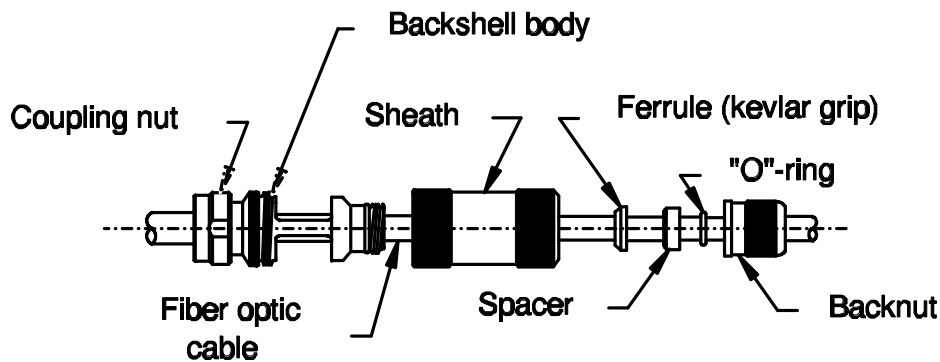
A1-1. Backshell parts on the cable (straight backshell).
